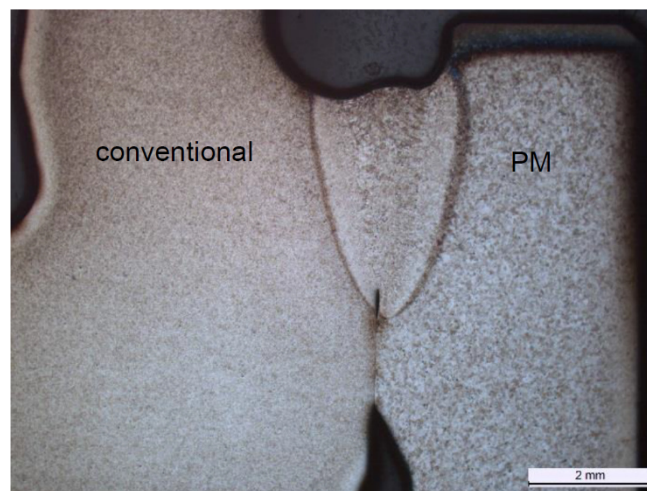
Detail of the weld between the synchronizing from conventional steel and the PM gearwheel (3rd speed)
